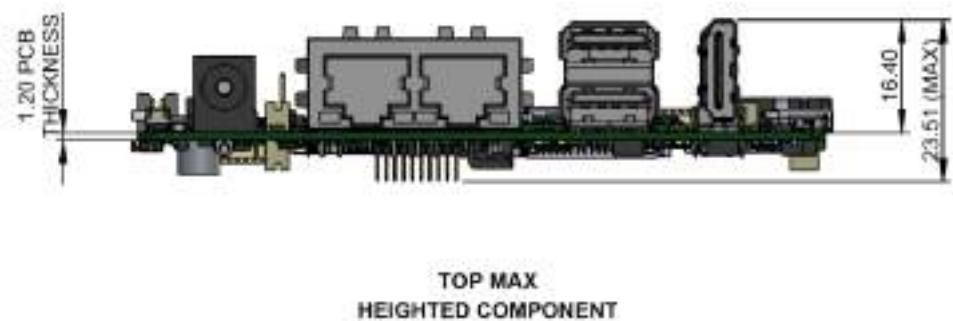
i.MX 8M Plus Pico ITX SBC Mechanical Dimensions - Side View 1
